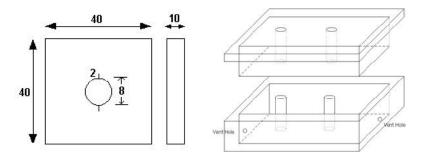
The shape of DCDC and the schematic diagram of hot plate mold.
